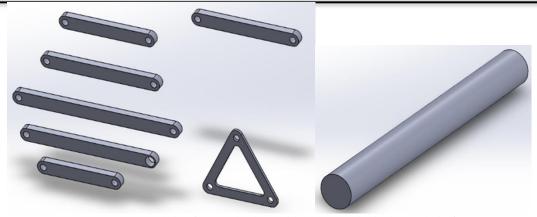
CAD Models of triangle-shaped link, straight links and shaft unit,
